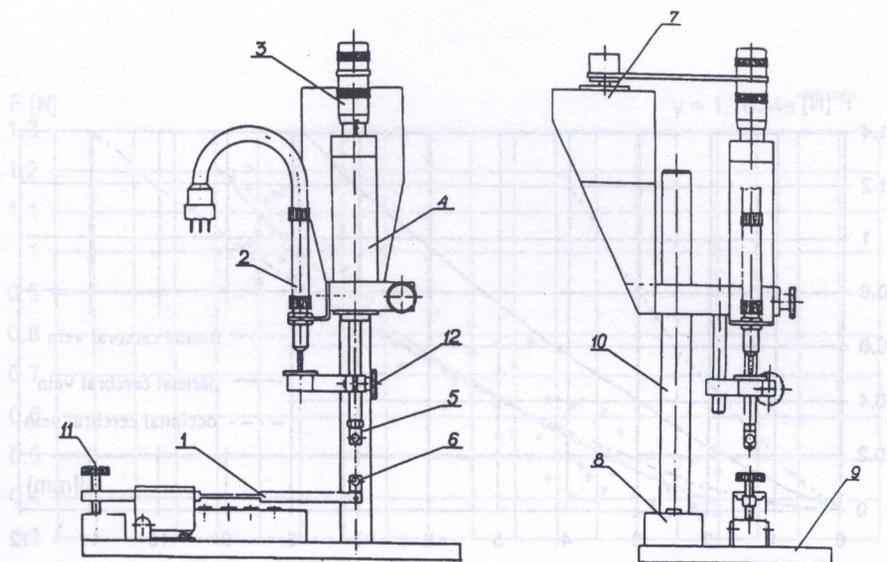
Microscarifier: 1 - force gauge beam, 2 - linear extension sensor, 3 - analog displacement indicator, 4 - tightener unit, 5 - upper mount seat, 6 - lower mount seat, 7 - actuator, 8 - force gauge electrical unit, 9 - base of microscarifier, 10 - column, 11 - preliminary tension correction screw, 12 - preliminary tension control knob.
